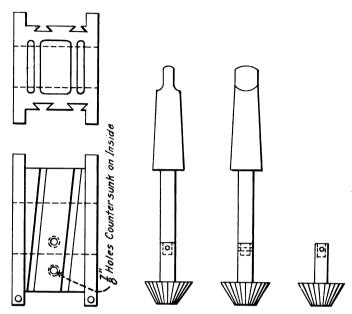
Showing Method of Dovetalling Boxes and the Special Tool for Countersinking Anchor Pin Holes
